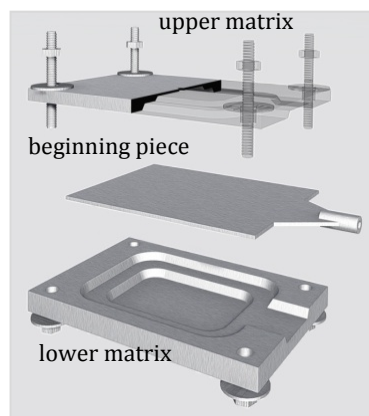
The position of beginning piece in the tool for hydroforming of welded sheets
